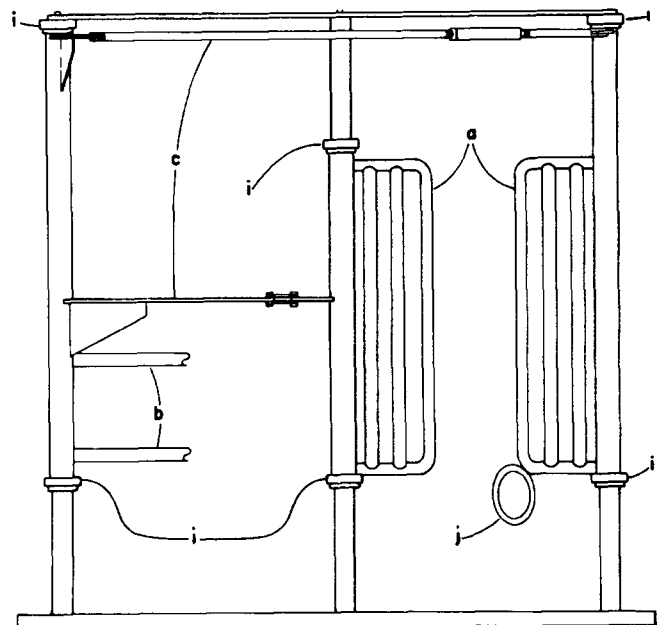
Entrance view of the mechanical animal-powered cow spacer with components identified. The letters refer to the following materials; [a] half gates, [b] bars, [c] mechanical linkage, [i] graphite-impregnated nylon bearings, and [j] steel ring.
